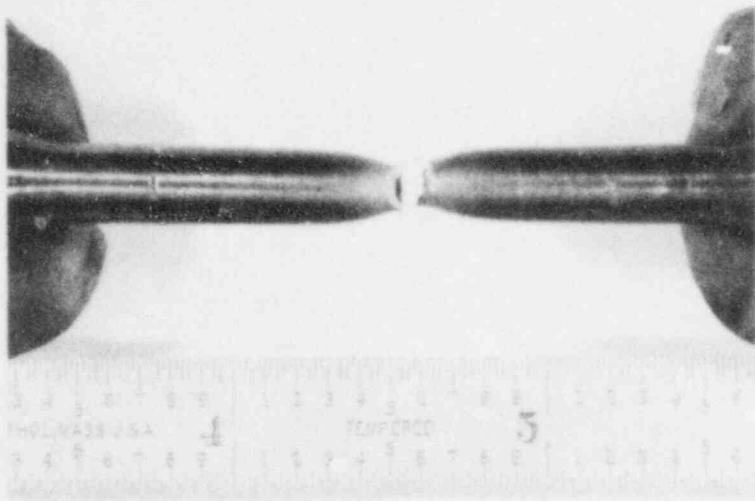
Fracture Location, Necking Behavior, and Fracture Appearance for Irradiated Base Metal Tensile Specimens.
